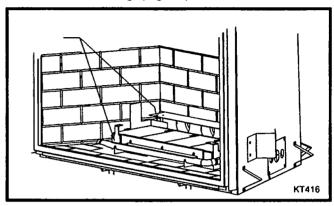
Use 3/8" socket to remove hex nuts holding left burner leg.
